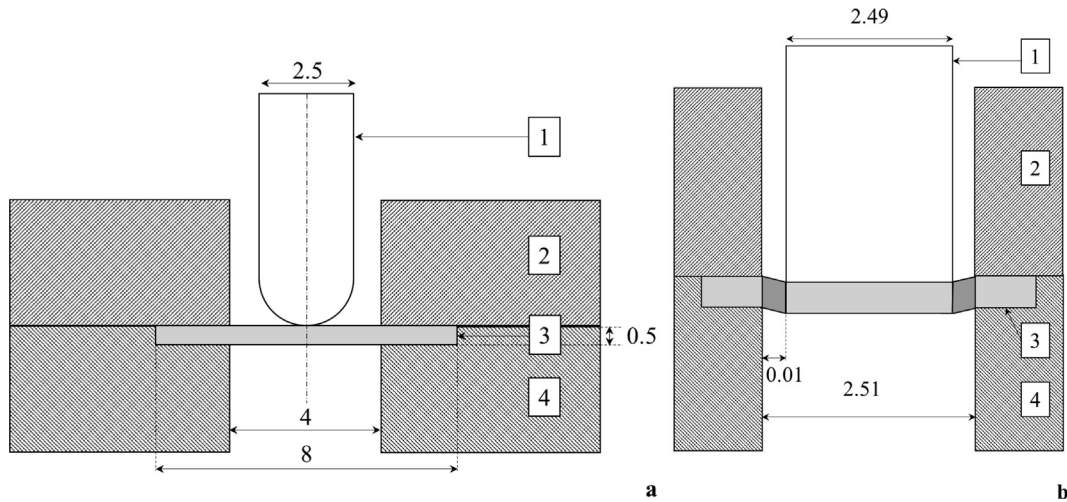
Schematic of (a) Small punch test, (b) Shear punch test.
